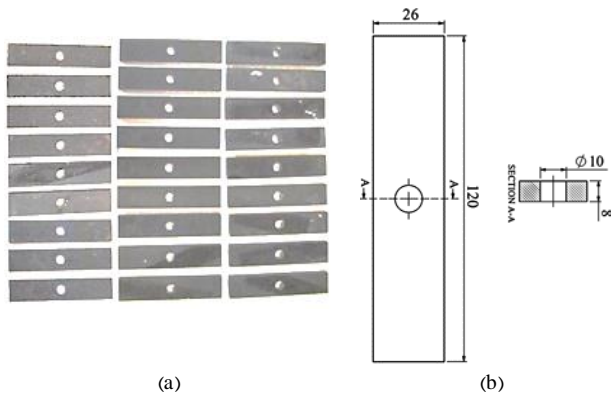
a- fatigue test specimens, b- specimens dimensions
